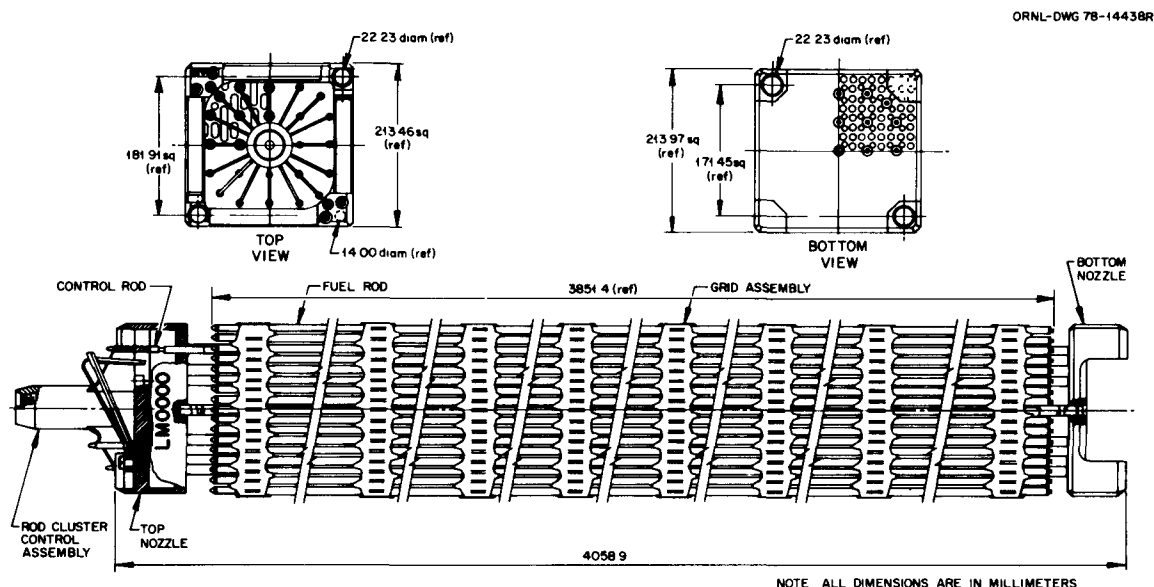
Westinghouse 17 × 17 array PWR fuel assembly.
